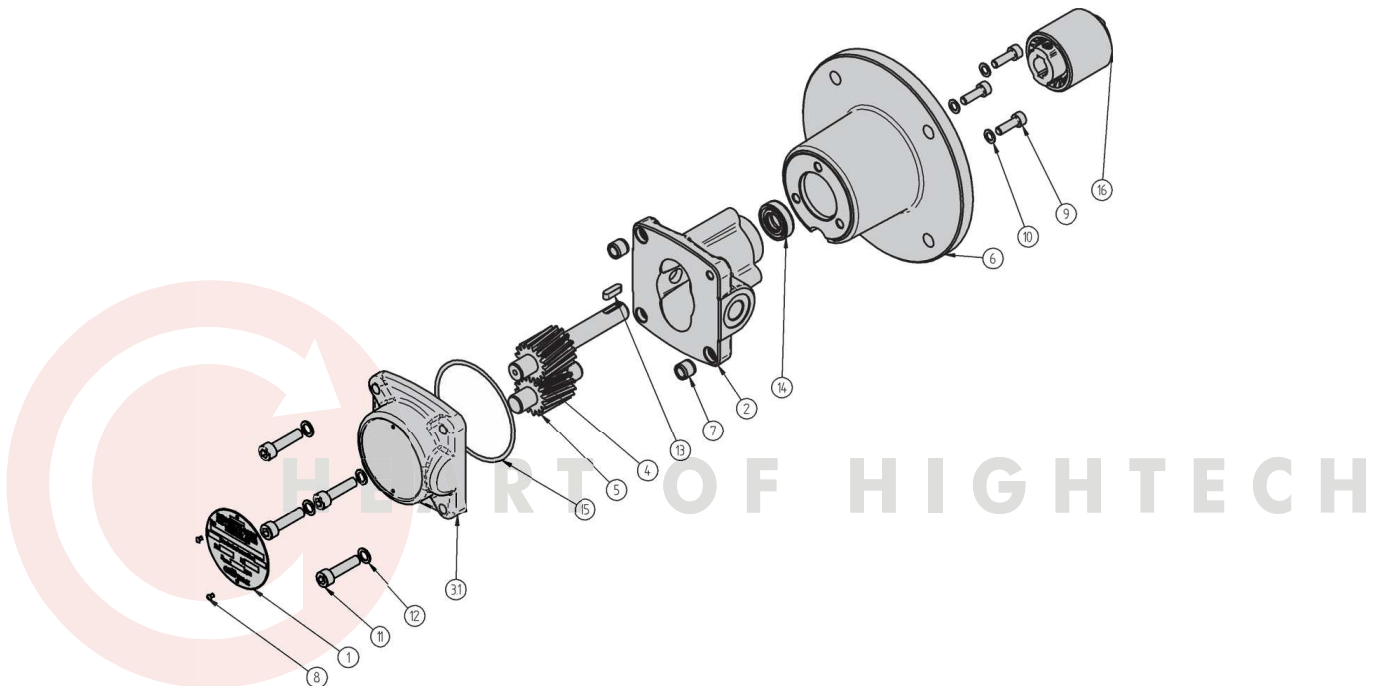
Exploded view of the gear pumps with the frame sizes 101, 102, 151, 152, 251, 252
